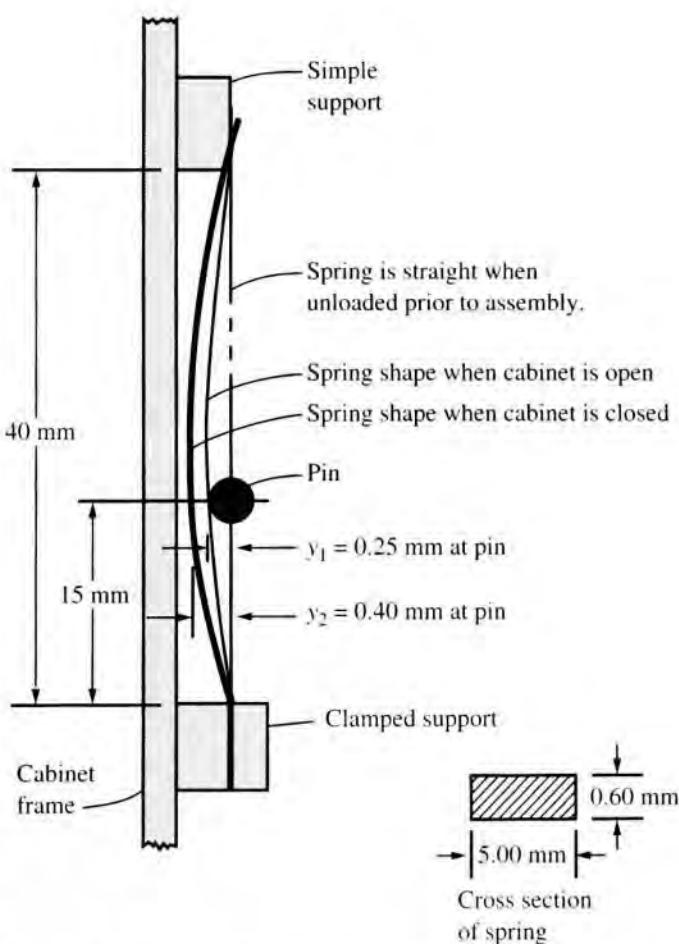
Cabinet latch spring (Problems 9 and 22)
